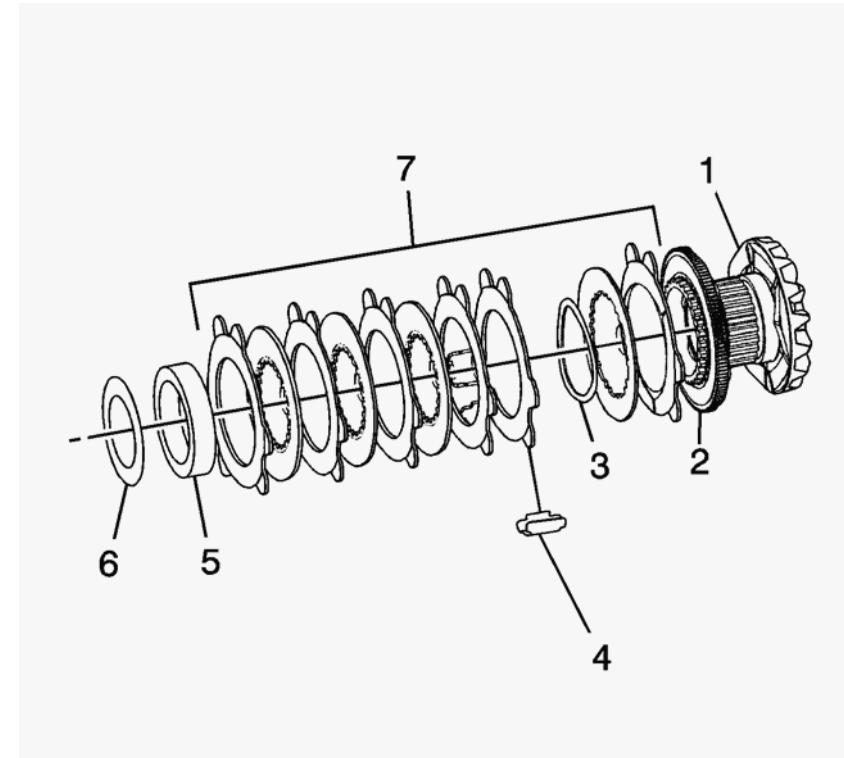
Disassembled View Of Locking Differential Cam & Locking Differential Side Gear
